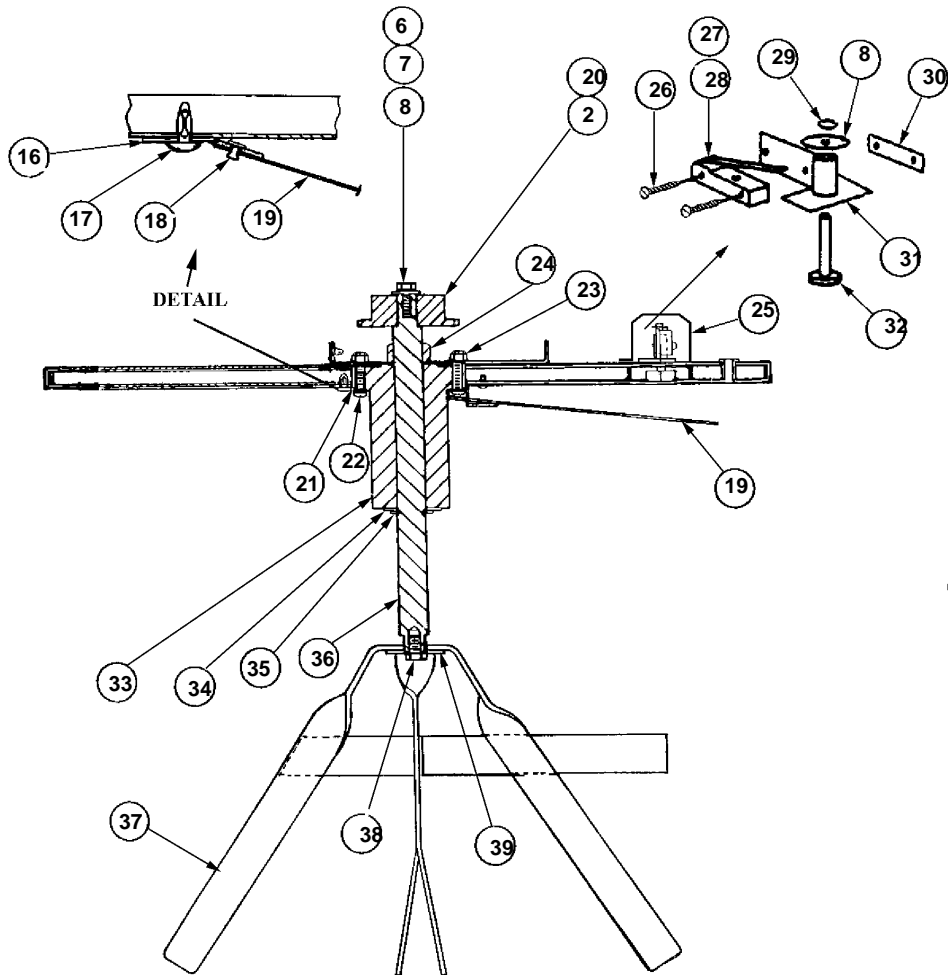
SIDE VIEW ICE LEVEL CONTROL ASSEMBLY IMD 300-30 AND
